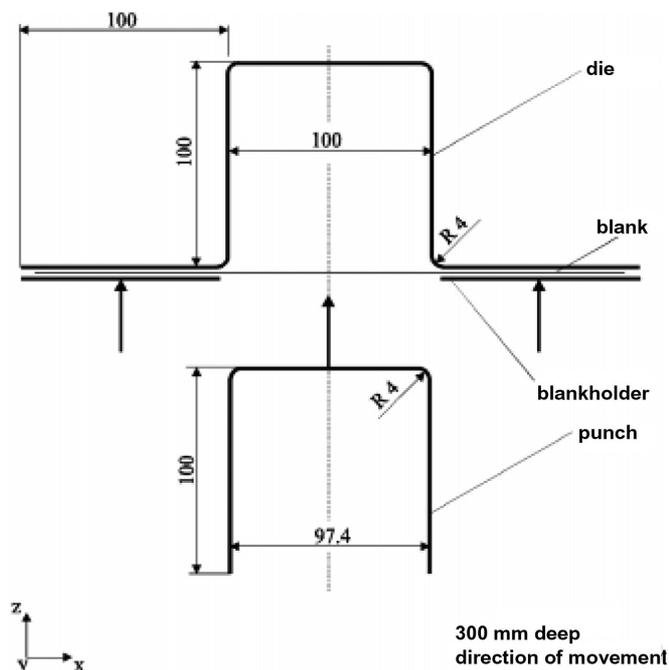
Tool geometry for stamping simulation of an U-shaped profile
